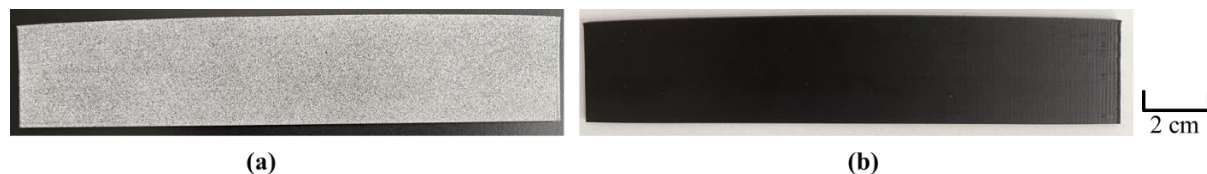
Rigid body test specimens: (a) with applied external speckle pattern, (b) as-manufactured surface.
